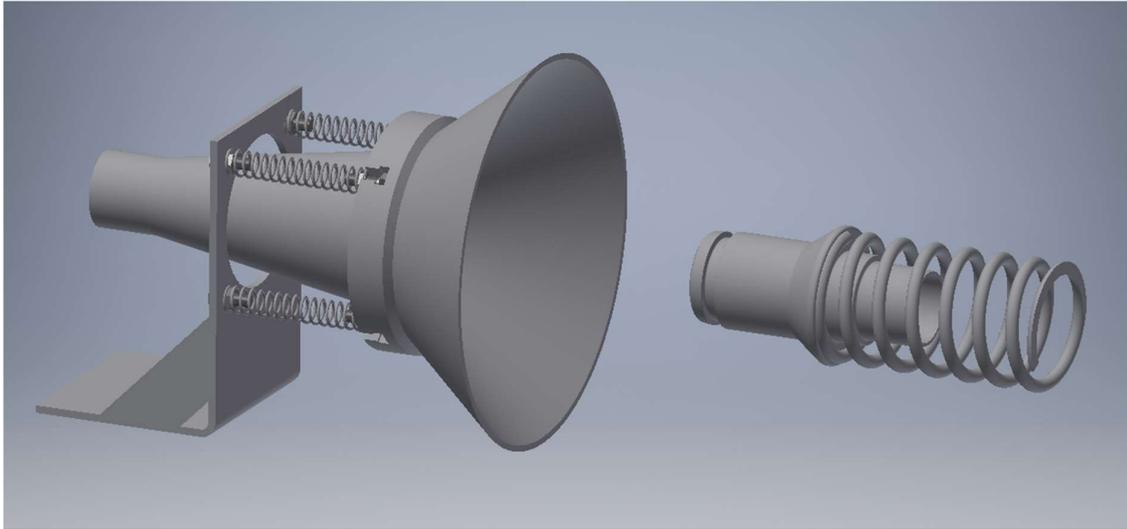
above shows the model of the female sprung mounting system. A 130mm x 5mm mild steel sheet was folded to make a bracket 200mm tall, which had clearance holes for the female receiver and M8 bolts. The bracket was braced with 40mm x 5mm flat plate and designed to bolt onto 4" SHS bars (or larger with a wider plate), that compose the SwarmBot 5's folded boom supports. 4 compression springs of OD of 18mm, 2mm wire diameter, free length of 98mm and spring rate of 3.19N/mm have M8 nuts welded into both ends (RS Components Pty Ltd, n.d.). The 4 springs provide an adequate force to arrest up to 790N of actuation before they reach their minimum working length of 35.9mm, which is more than twice the maximum force recorded from the electric actuator used throughout experiment 2. For a stronger actuation force, the springs can simply be swapped out for higher rated springs.
